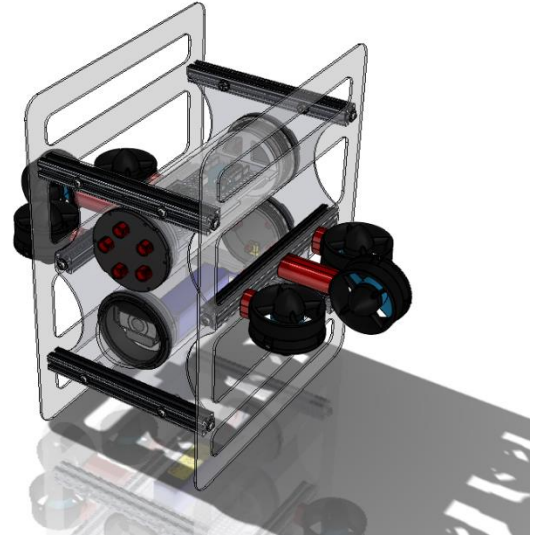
Solidworks CAD model of M4G1K4RP frame with thruster configuration.
